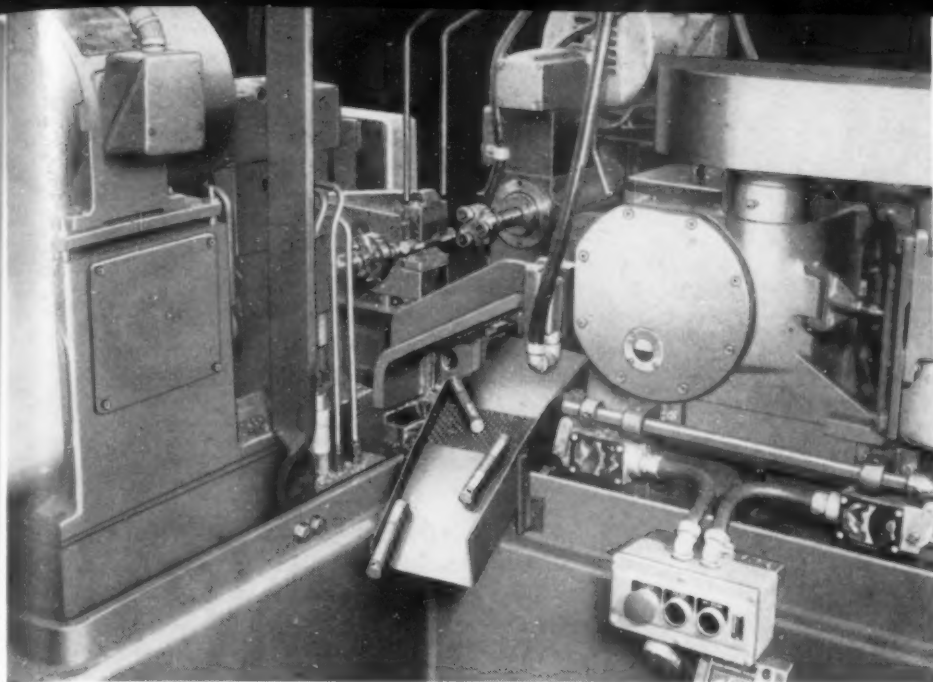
Differential pinion shaft emerges from automatic transfer line after being cut off in circular sawing operation.
